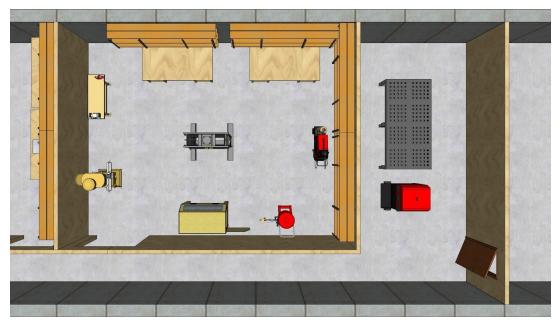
Metalshop design showing several tools including a plasma cutter, sandblaster, drill press, milling machine, and grinder. A closed off area for welding is also shown to the right.
